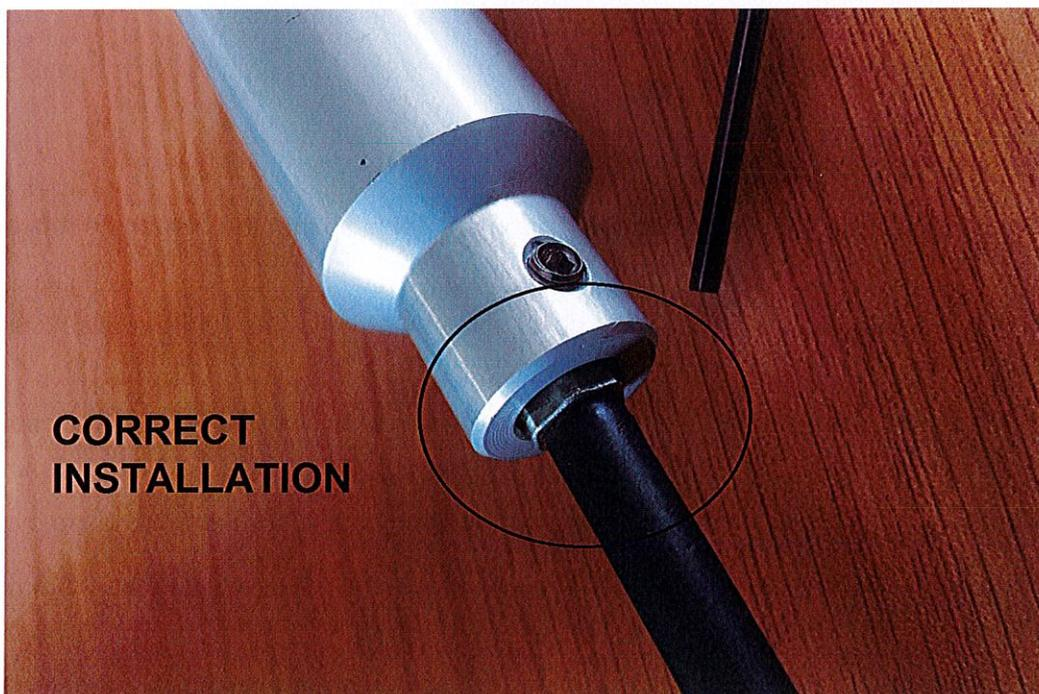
shows the steel end piece protruding out of the rocket base and indicates a correct installation.
